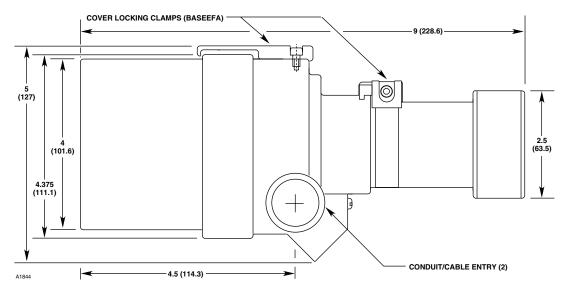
Dimensions of U7602E in Inches (Millimeters)
